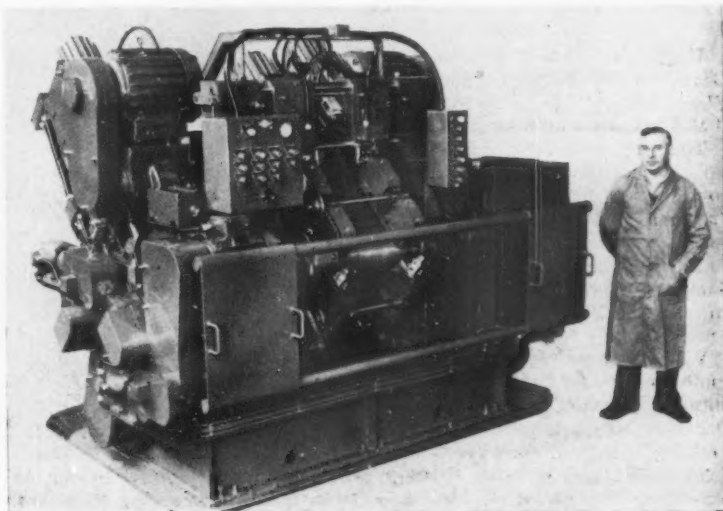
Large Drum-type Indexing Machine Exhibited by Gay's (Hampton), Ltd.
